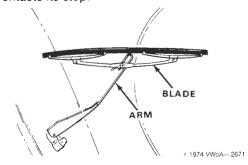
Wiper blade turned to an angle with wiper arm.
